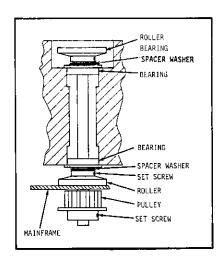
Roller Shaft Bearing Preload Adjustment
